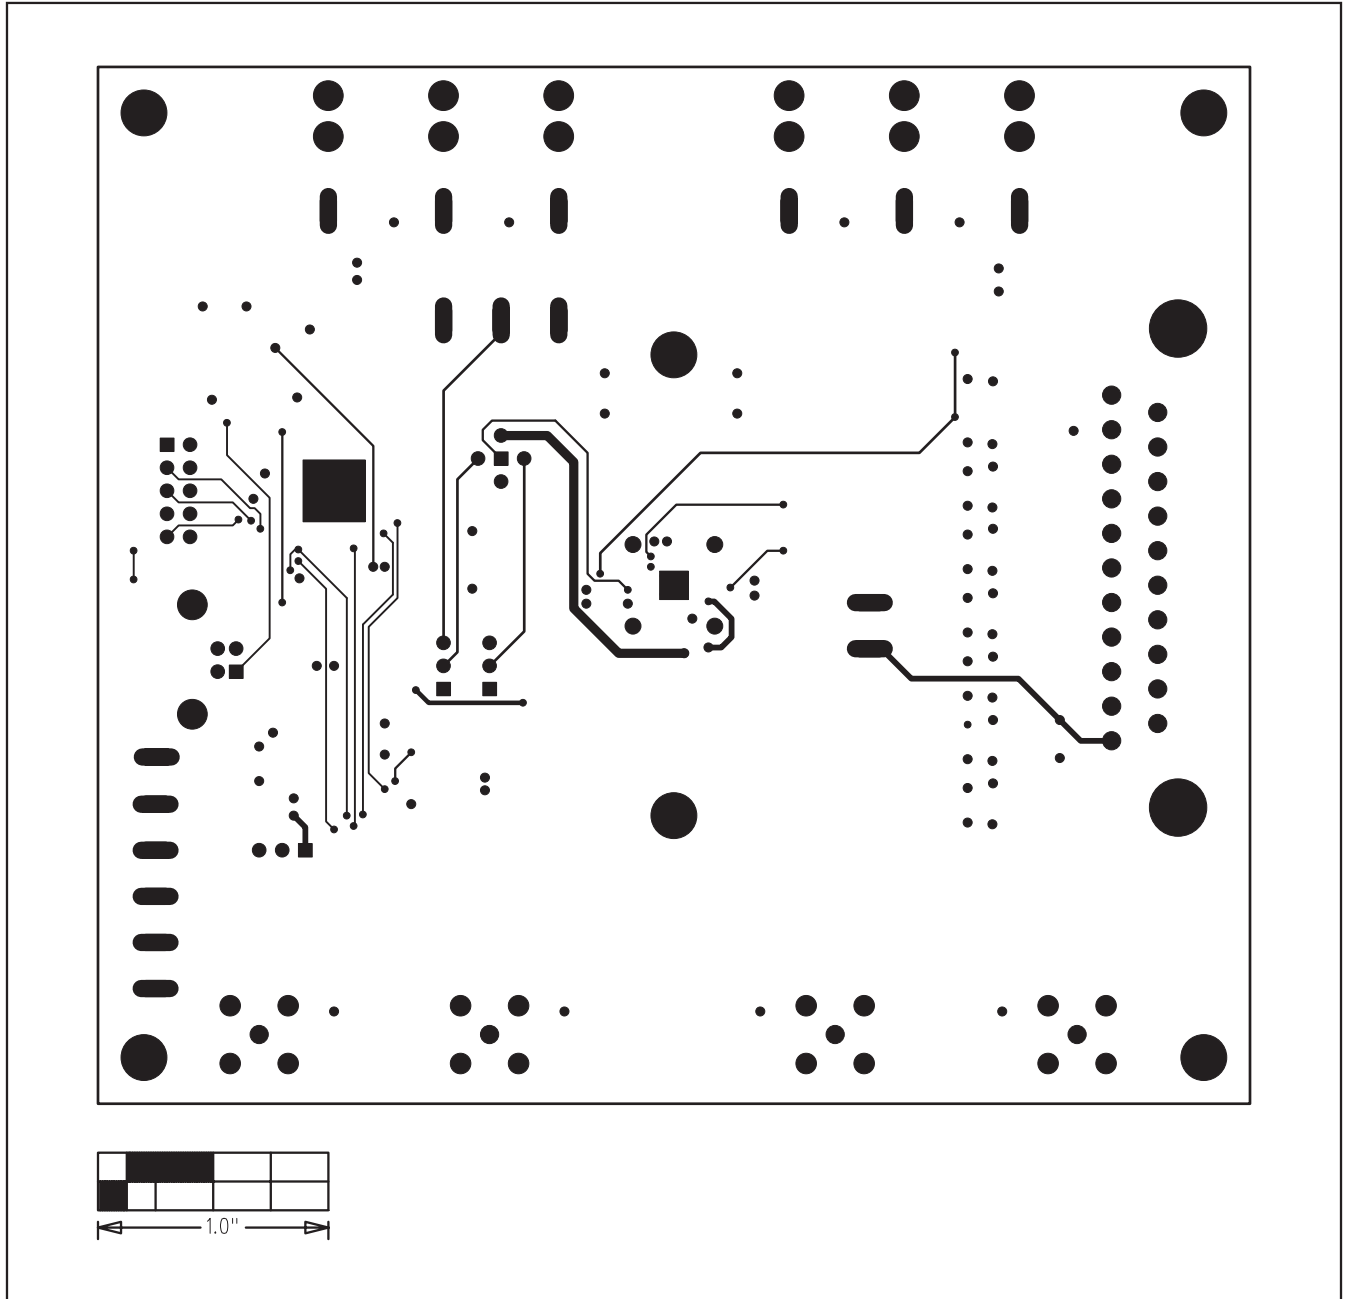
MAX9597 EV Kit PCB Layout—Solder Side
